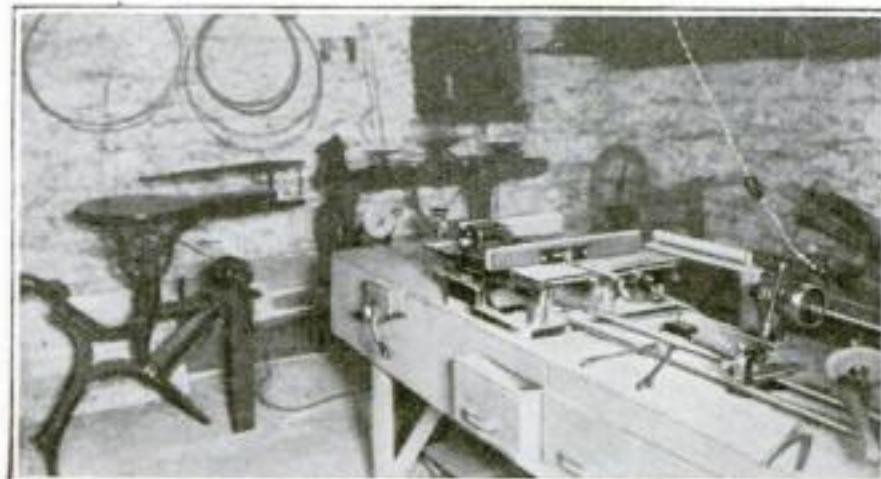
Woodworking bench with a combination machine and a wood-turning lathe. In the background is a heavy jig saw and a speed lathe.
